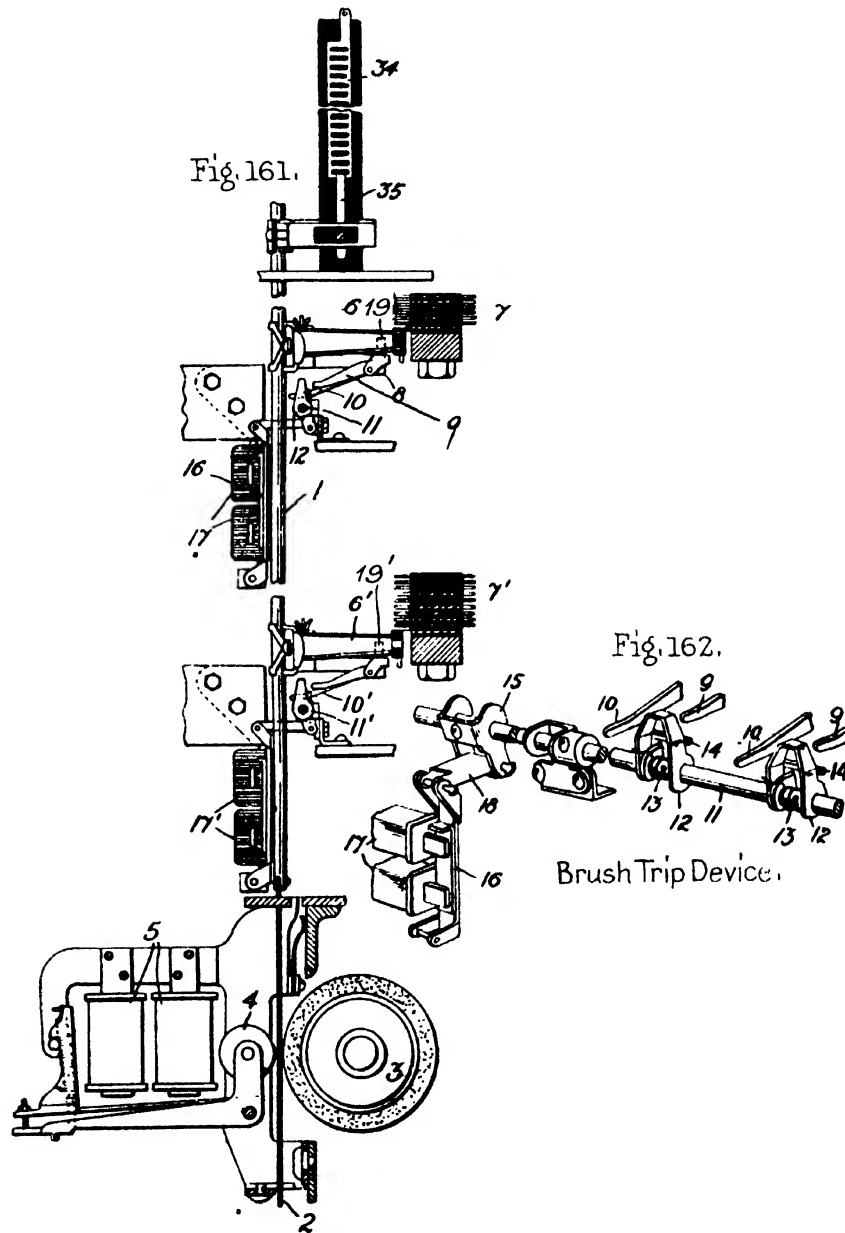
is a side elevation of one form of a 500-line call-finder panel switch with parts broken away, having a common trip rod.
